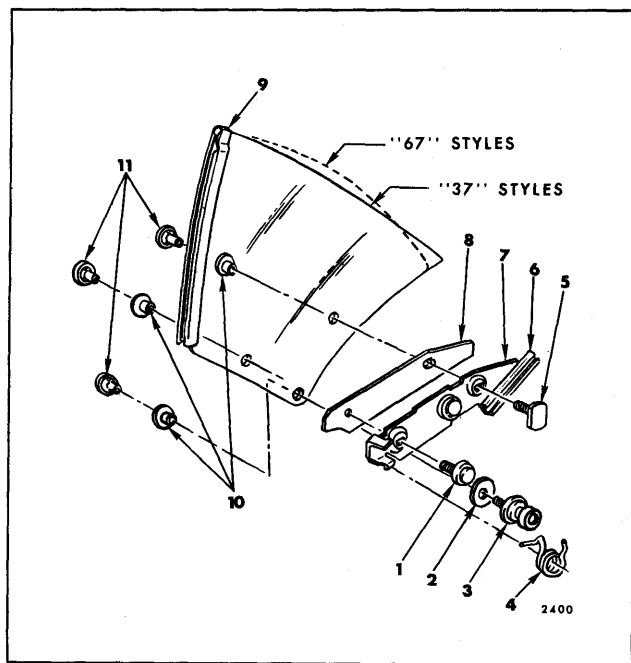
Rear Quarter Window Assembly - "F" Styles
